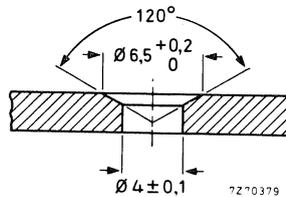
Shape of hole for 500 V insulation, nut fastening.
